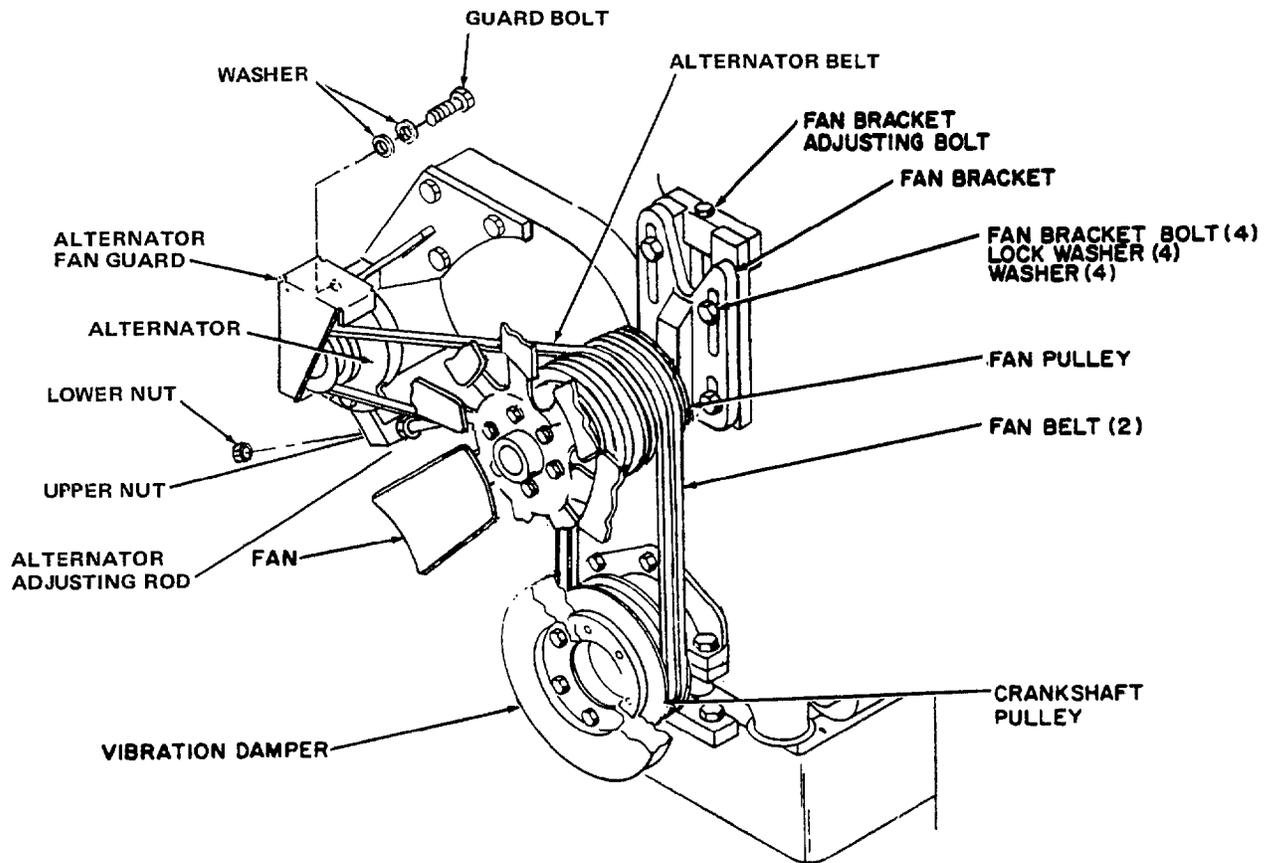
Alternator and Fan Belts, Removal and Installation
